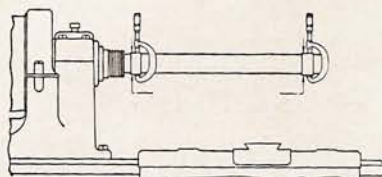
Testing Alignment of Spindle by Machining a Piece in the Spindle
